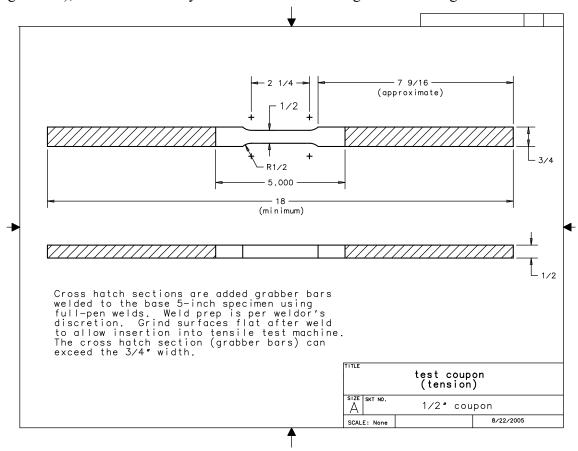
Sheet-type subsized specimen geometry used for initial quasi-static testing.
